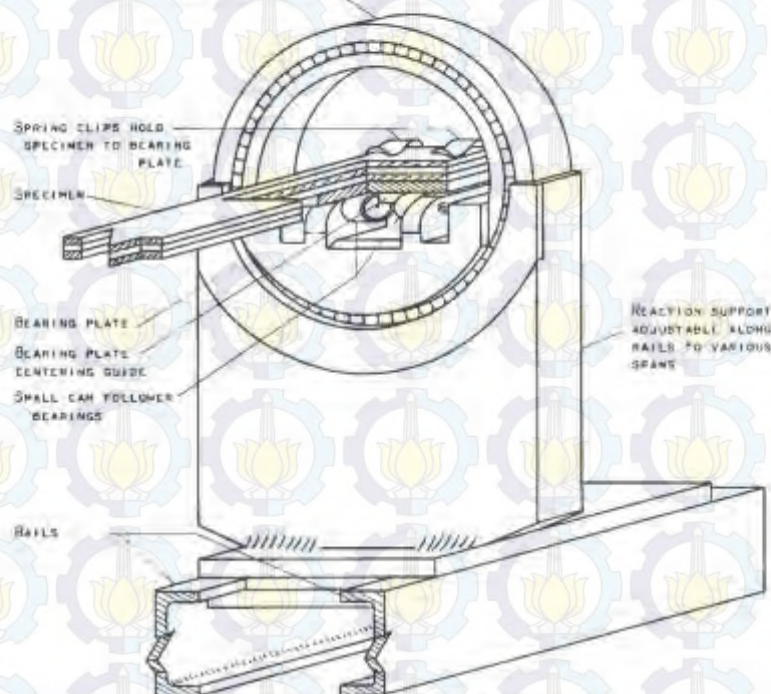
Reaction Bearing for Small Flexure Test Specimens
